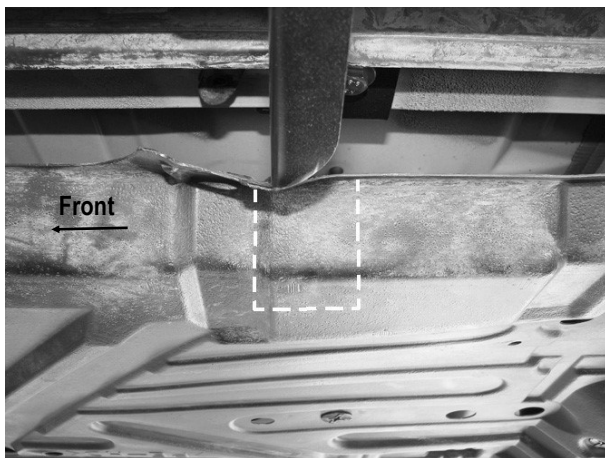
B) Hold Plastic Cover Up In Position To Determine Area To Cut From Cover. Driver Side Front Cover Pictured
